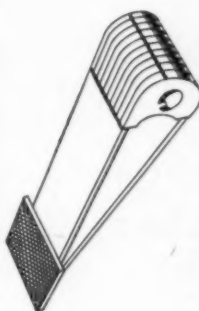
Saves 67%. Eliminates Broaching. Hub with integral key is produced by stacking stampings in assembly. Arm is 10 gauge, brake formed and welded to hub. Cost is only 31¢... weight 2.2 pounds.
